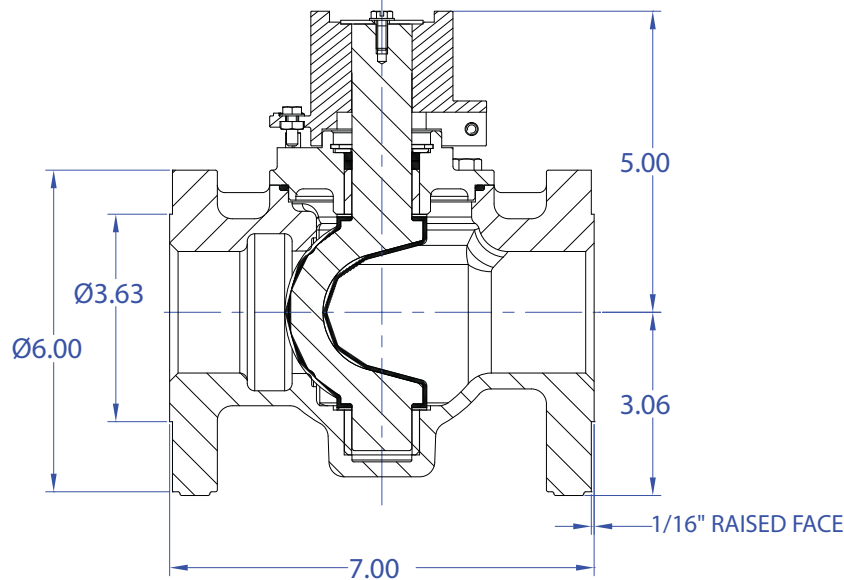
A Ductile Iron/603AS Stainless Steel 1/2" - 2"
